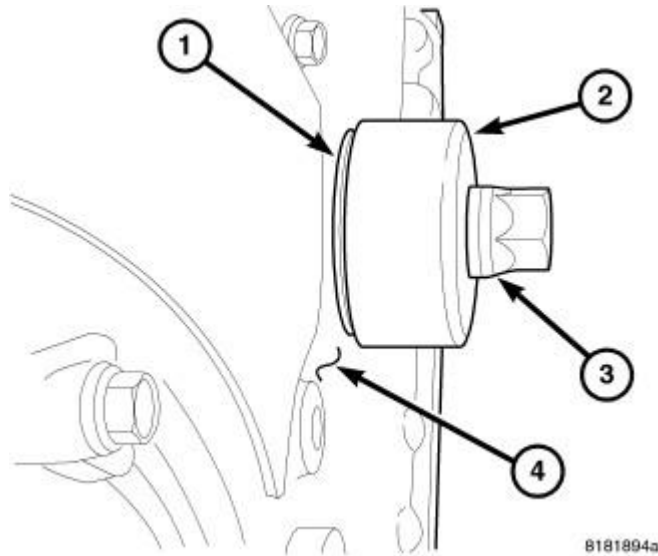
Installing New Seal By Using Seal Installer 9506 & Crankshaft Damper Bolt
